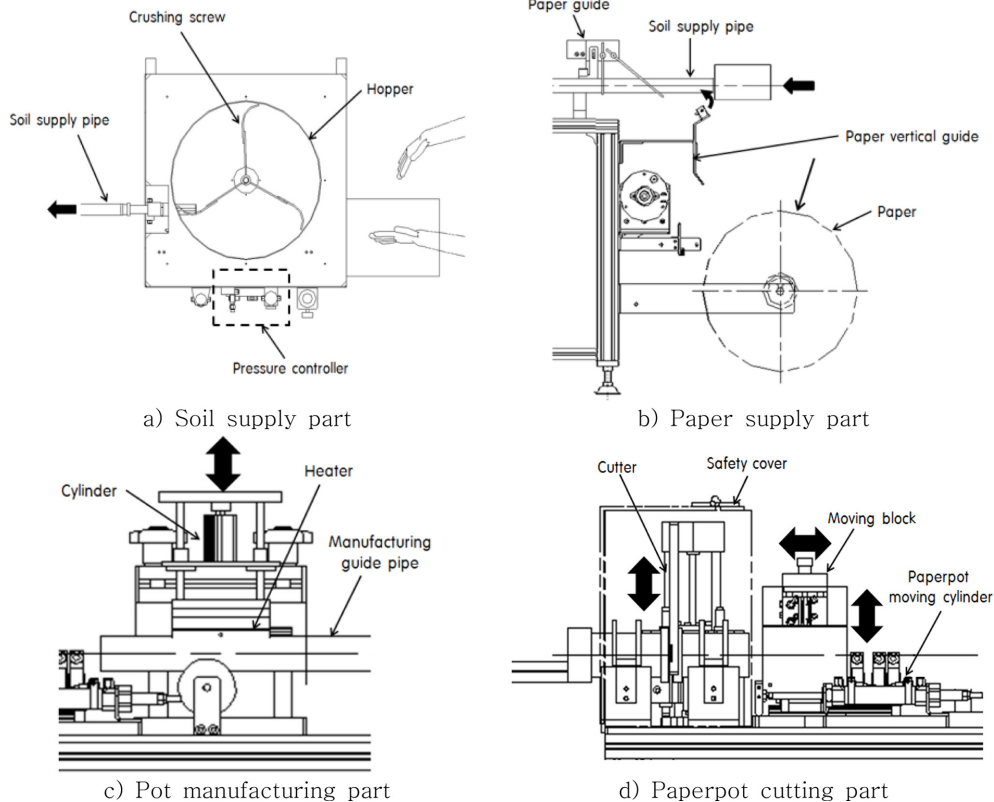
Part diagram of the cylindrical paperpot manufacturing equipment.
